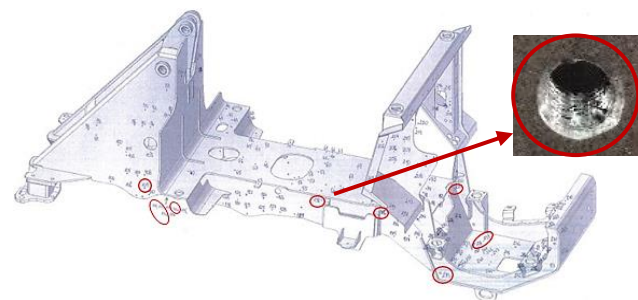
Weld spray zones [Hofrova 2018]
